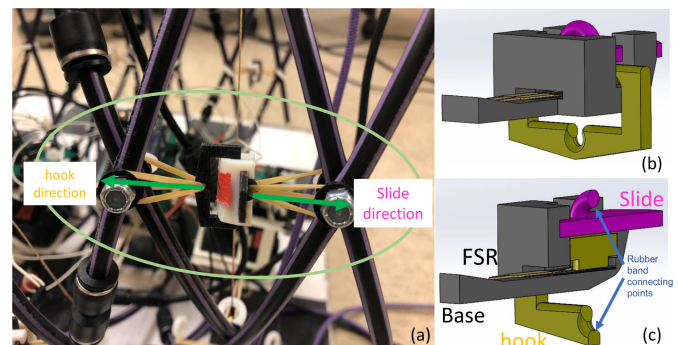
(a) Installation of the stretch sensor on the side of the segment. (b) Stretch sensor assembly. (c) Parts of the stretch sensor components.
